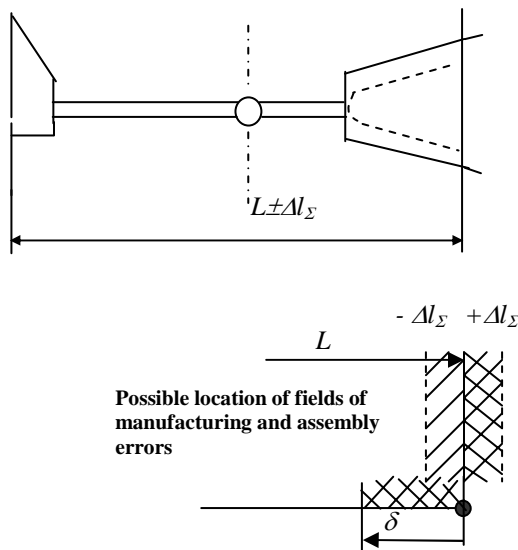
The scheme of possible layout of fields of manufacturing and assembly errors
